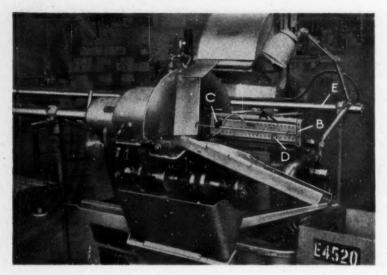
Brown & Sharpe No. OG Automatic Adapted for Producing Shaft Components
